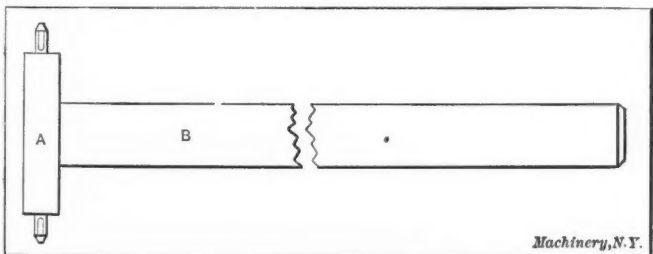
and 2. Inside Caliper and Same Tool with Handles for Deep-hole Work lation from the heat of the hand and furnishes a convenient place on which to mark the size to which it has been or is to be set in the inspection department. Fig. 2 shows how I would rig up one of these sticks to caliper the size at the bottom of a deep hole such as J. W. M. mentions, and with it I believe it would be an easy matter to ascertain the size within 0.00025 providing, of course, an outside micrometer of the required size is convenient. However, if the pieces are to be measured in large quantities, a star gage would be much quicker.
